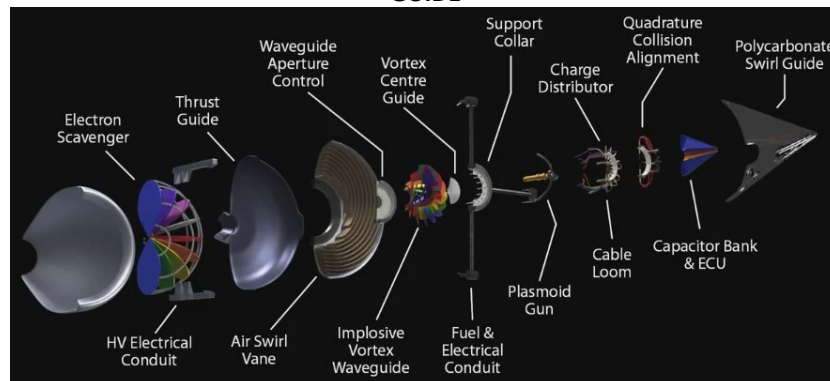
NAMED EXPLODED VIEW PARTS OF THE MOLTEN SEA TORUS VAJRA IMPLOSIVE TURBINE SWIRL GUIDE
